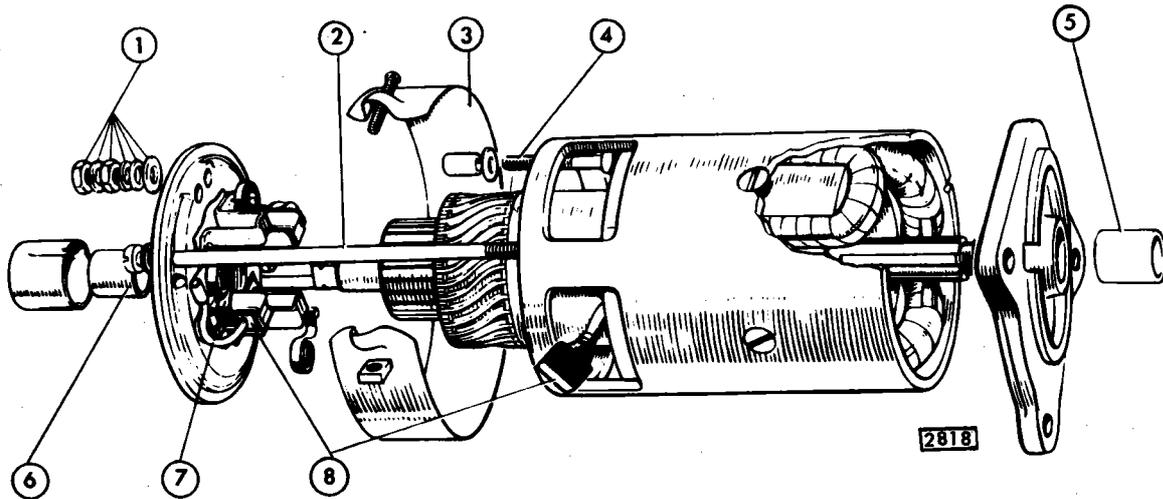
Exploded view of the inertia drive starter motor (45G)
